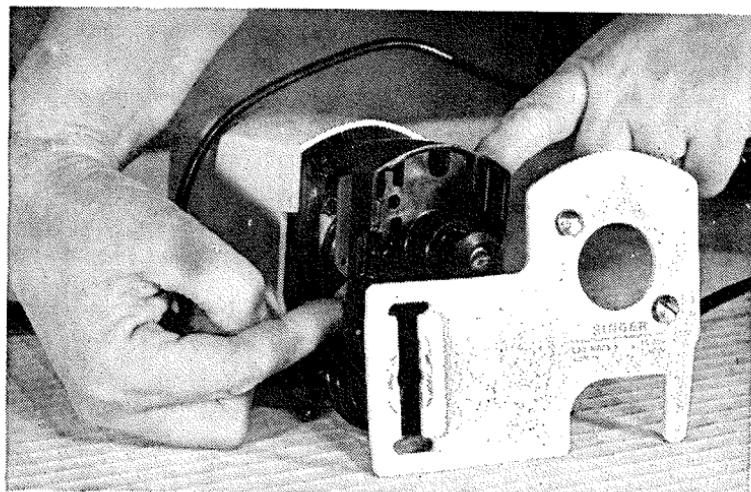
On the Singer Model 248, the motor brushes are made accessible by removing the entire motor housing.
